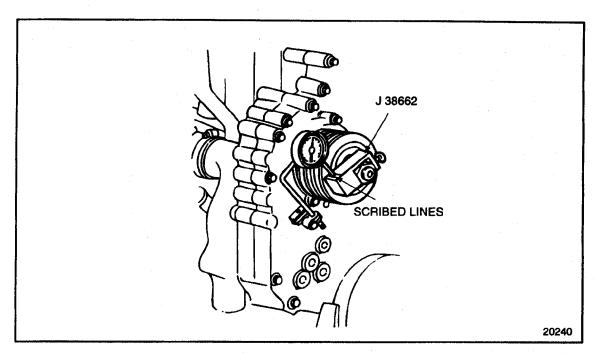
Accessory Drive Gear-to-Bull Gear Lash Measurement
